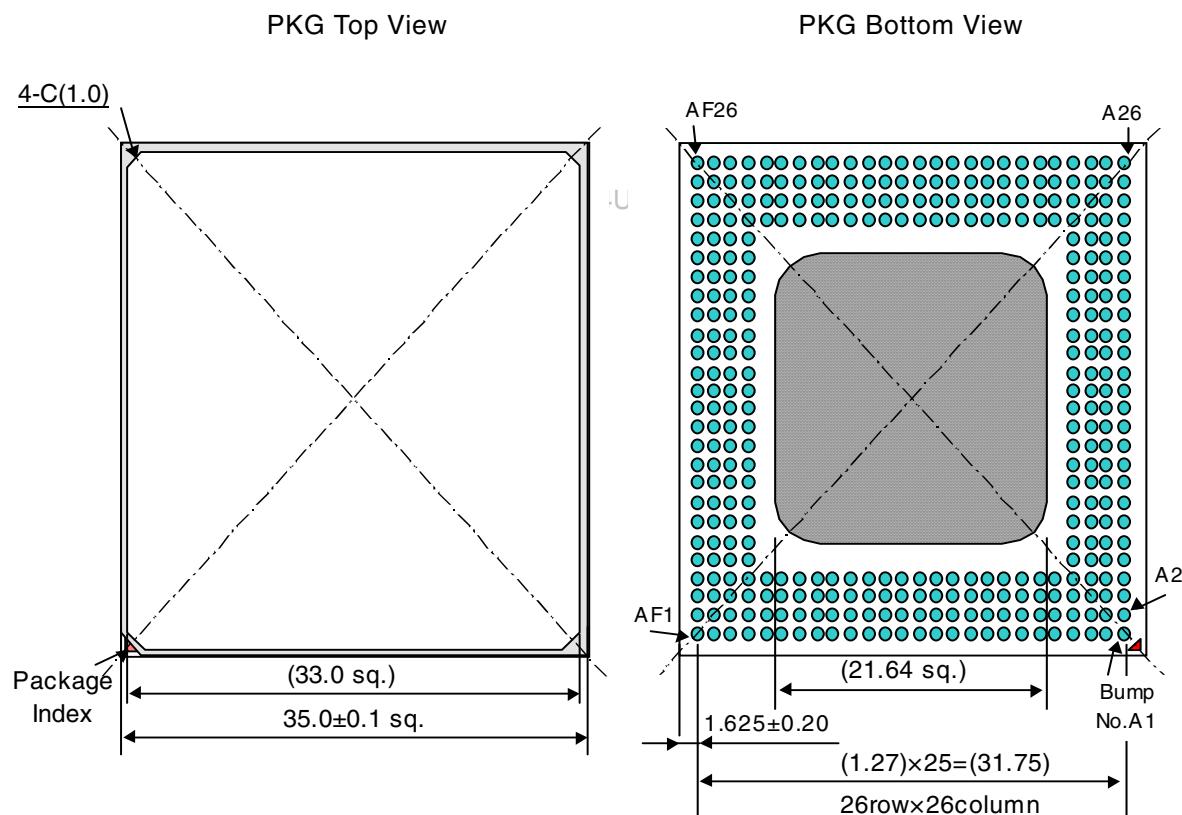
352 Pin BGA Outline and Footprint - Top and Bottom Views
